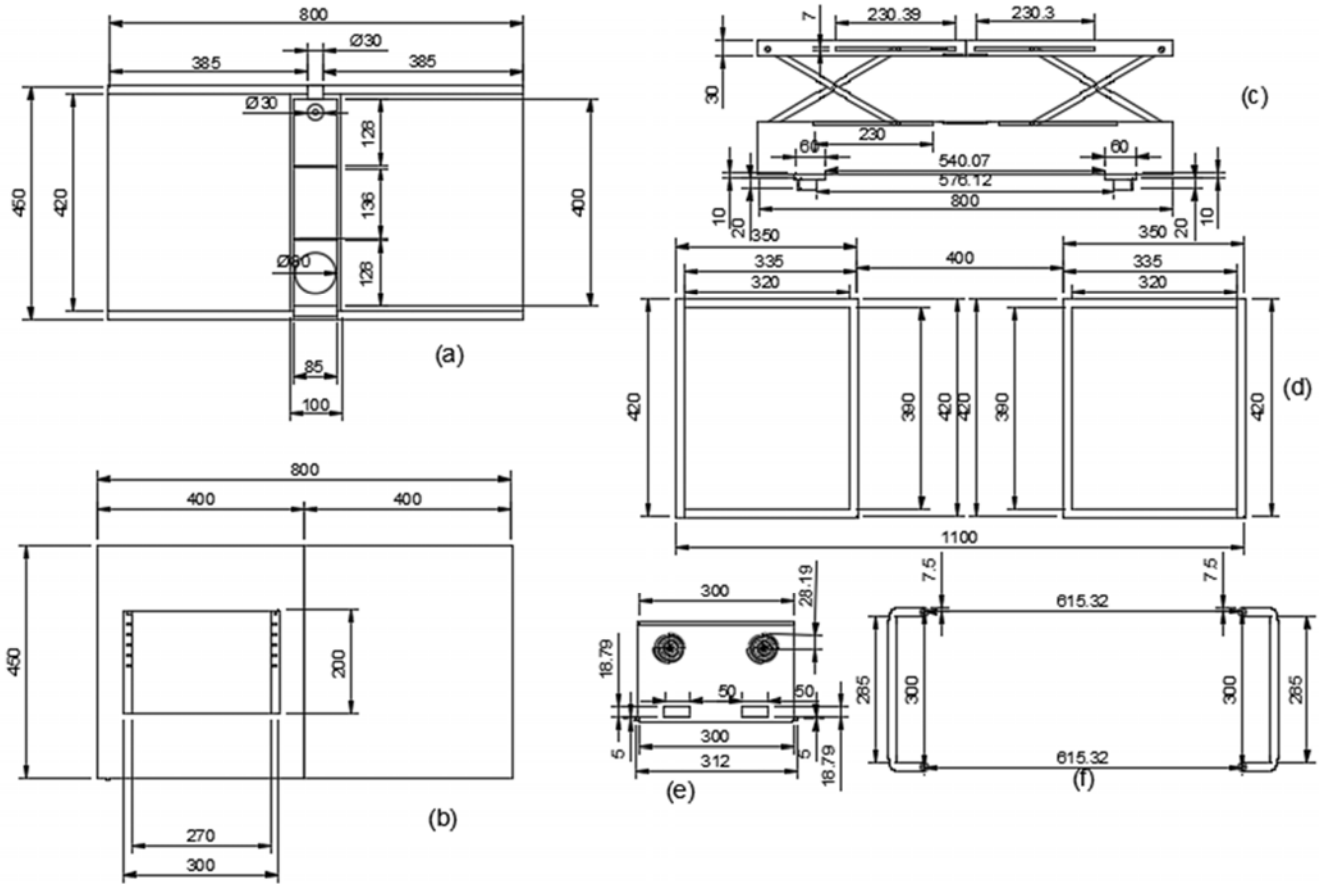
(b) Dimensions of table parts (in mm) as follows: (a) Table base (b) Table top (c) Adjustable mechanism (d) Left – right drawer (e) Laptop stand (f) Table legs
